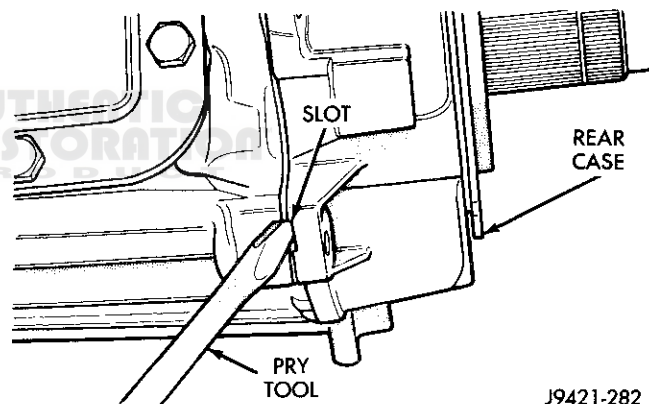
Loosening Rear Case (Breaking Sealer Bead)
